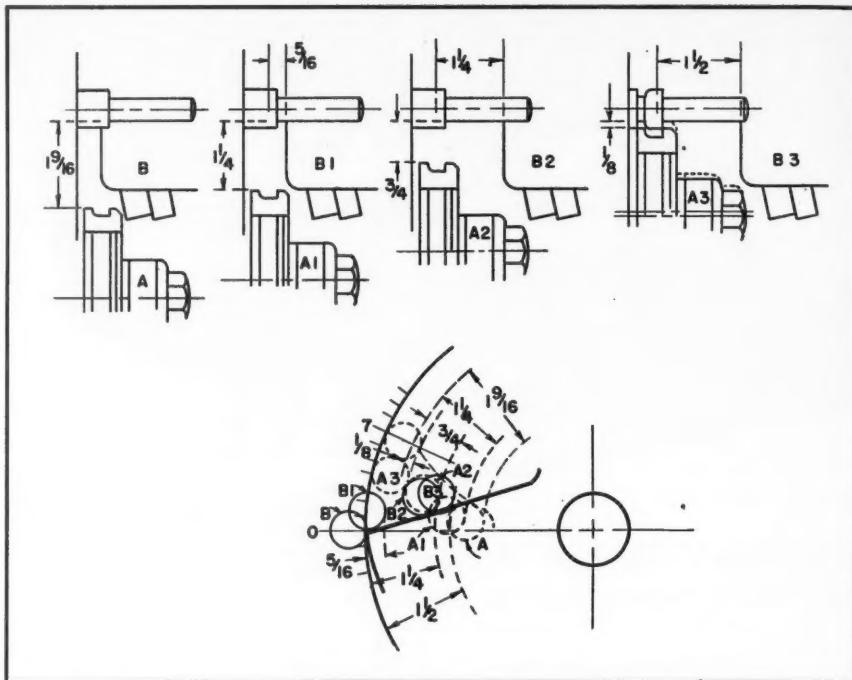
Diagram Illustrating Method for Determining the Clearance Time Between the Box Tool and Front Cross Slide Tool
